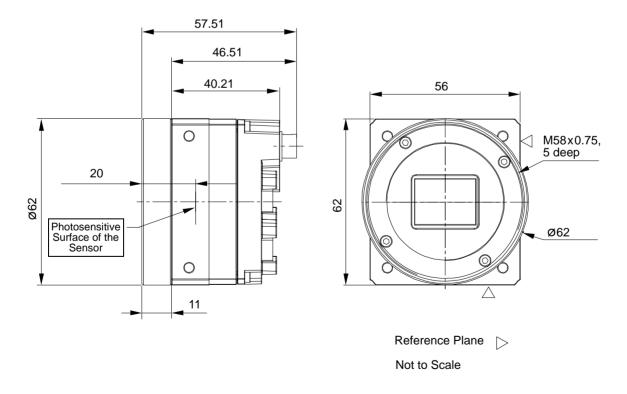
M58 x 0.75 Mount Adapter on a Basler beat Camera Link Camera; Dimensions in mm
